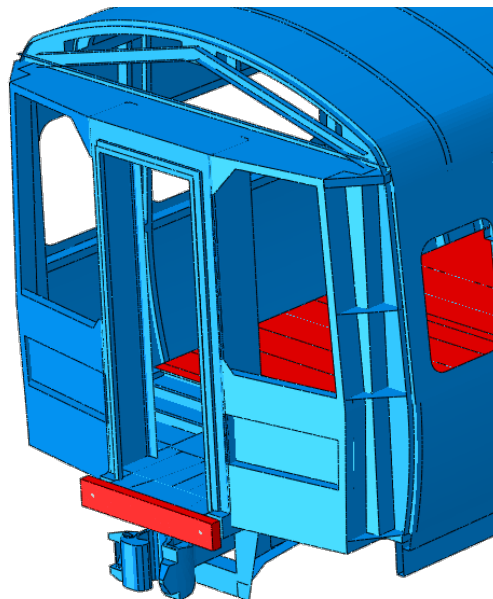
Detail showing front end of modified cab car FE model with added buffer beam, highlighted in red, and small round discs representing the ends of springs coupling the buffer beam to the end beam of the car, highlighted in yellow
